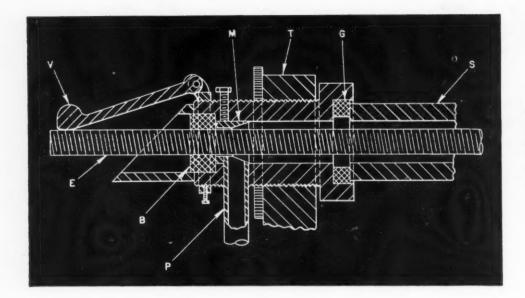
Attachment that Provides Coolant for the Die-head Shown in the Set-up in Fig. 1. A Flap Valve Prevents the Coolant from Escaping at Left-hand End of the Attachment
